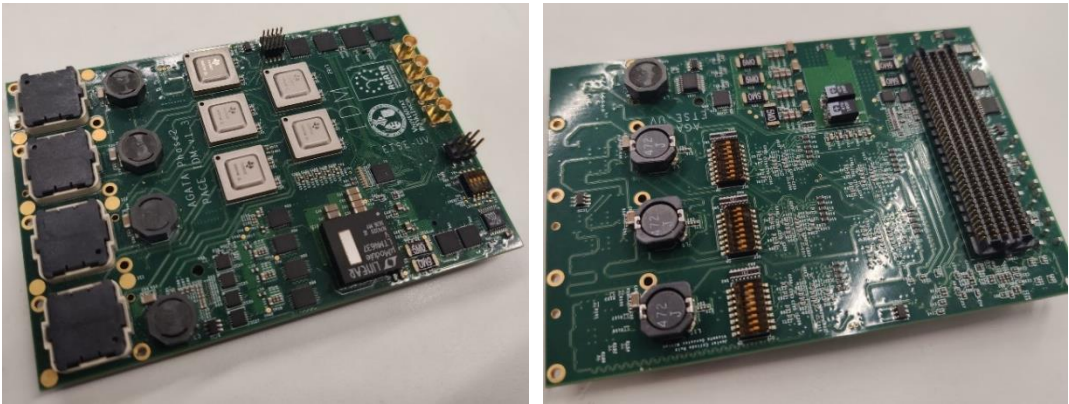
The IDM prototype v1.2, TOP and BOTTOM view respectively.
